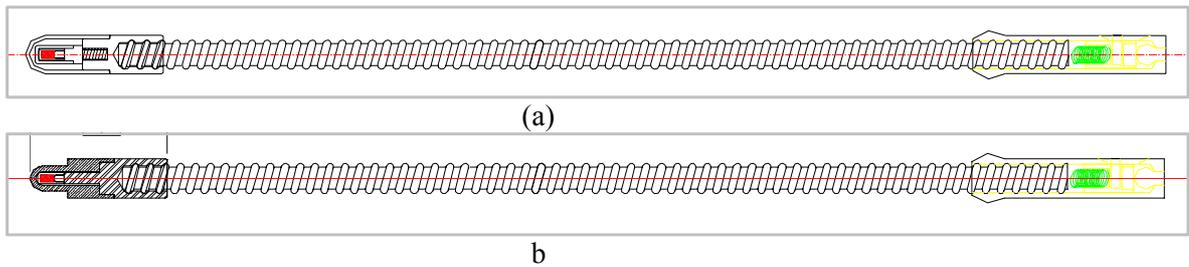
Drawing of Yb-169 source holder; (a) Type I, (b) Type II
